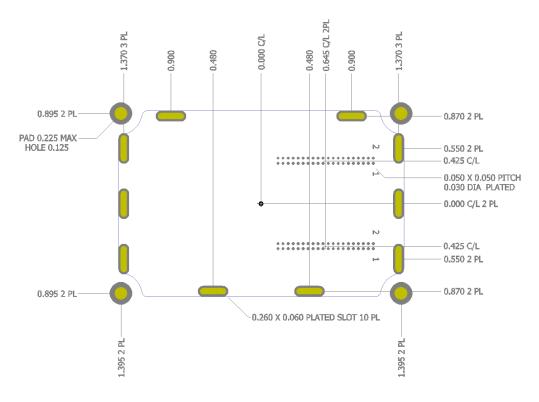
Dual-Axis PCBA Footprint w/o Mating Connectors
